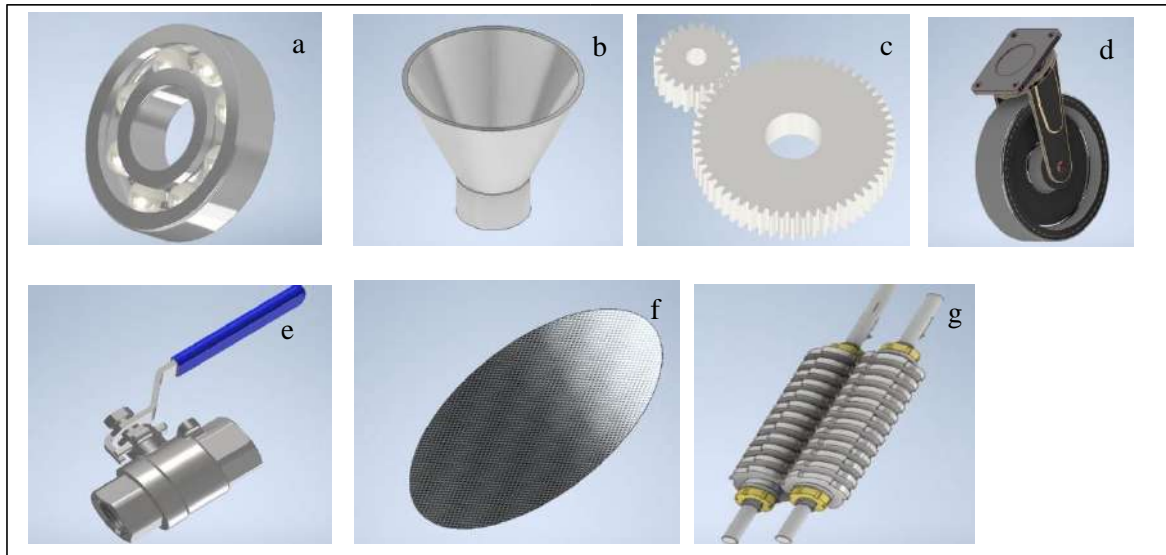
Illustrating the main components of: a. ball bearing, b. funnel, c. gear, d. wheel, e. ball valve, f. sieve, and g. crusher installed inside the Biobin.
